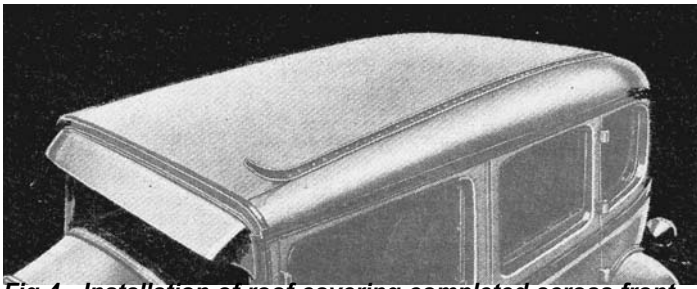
Installation of roof covering completed across front of roof and left side moulding nailed but not swaged.
